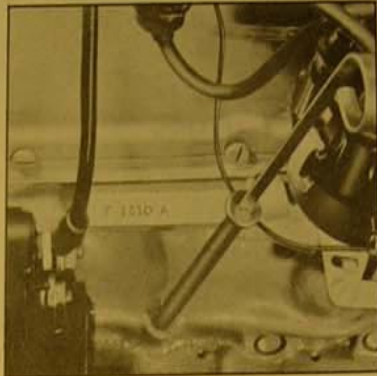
Six cylinder engine unit number located on pad on right hand side of cylinder block at rear of distributor.
